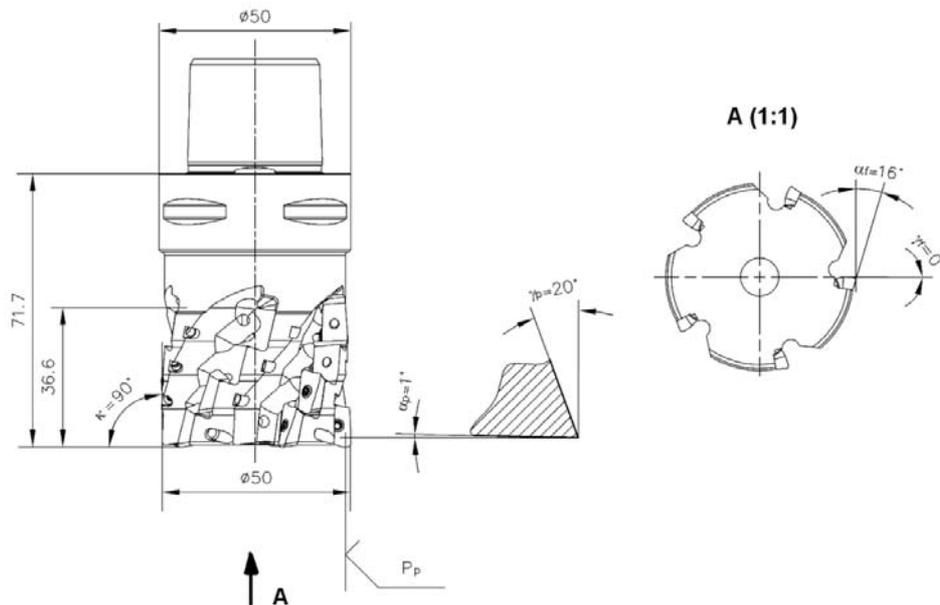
R390-050C5-36H face mill with the determined geometry [4]
